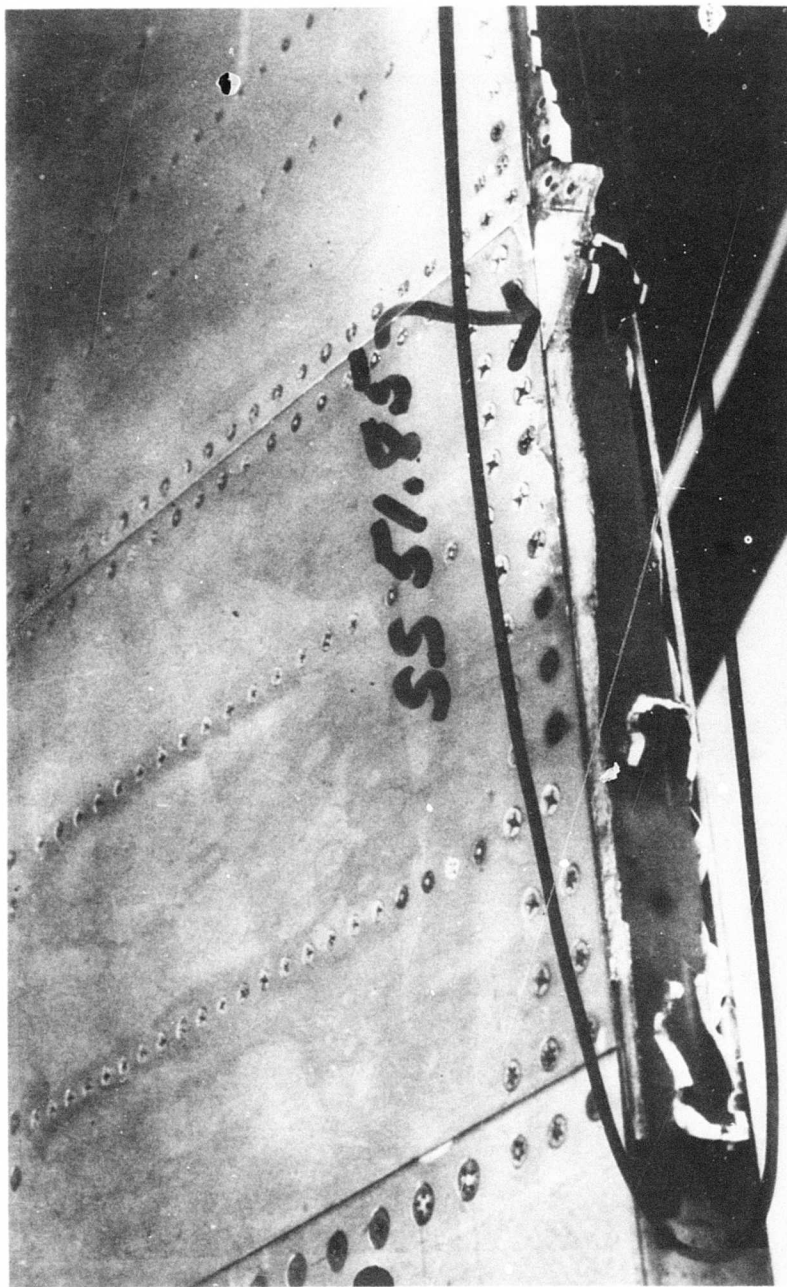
Fatigue Failure of Stabilator Rib
